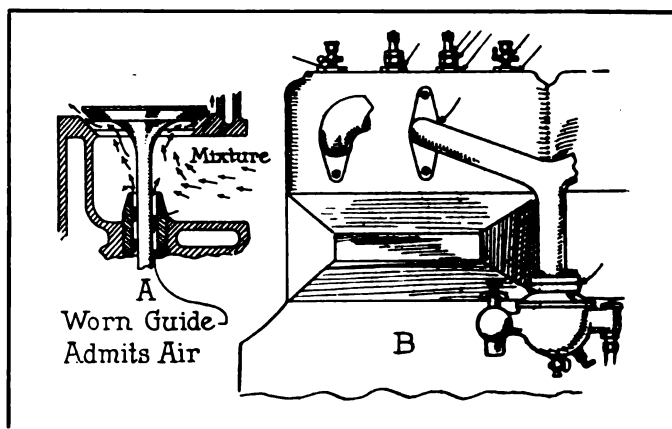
A, Fuel Gas Diluted by Air Admitted Through Worn Valve Stem Guide; B, Air Leaks About Spark Plugs and Intake Manifold.
